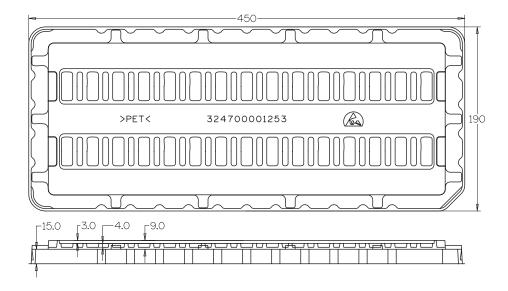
Tray cover dimensions for L2T0-xxxx012M00000.
